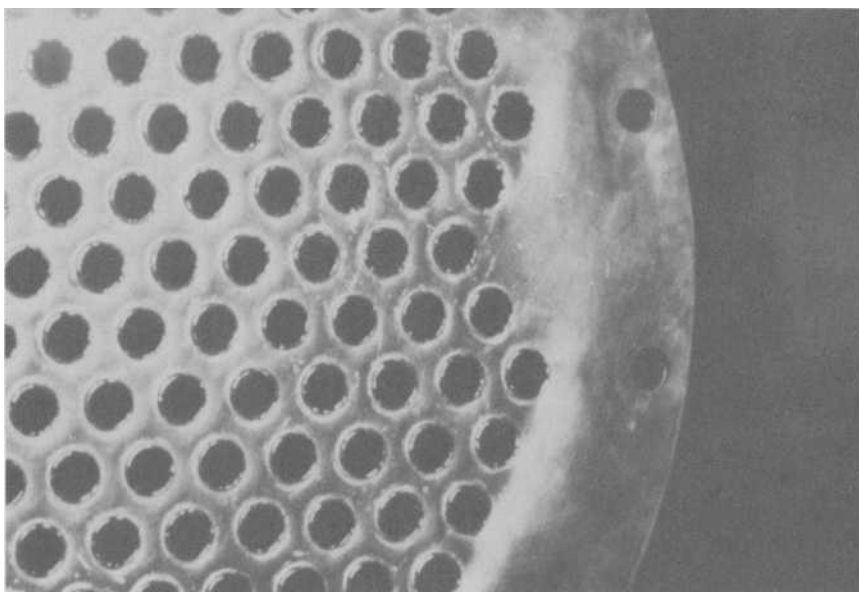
Heat exchanger showing tantalum tube/tube sheet welds.
